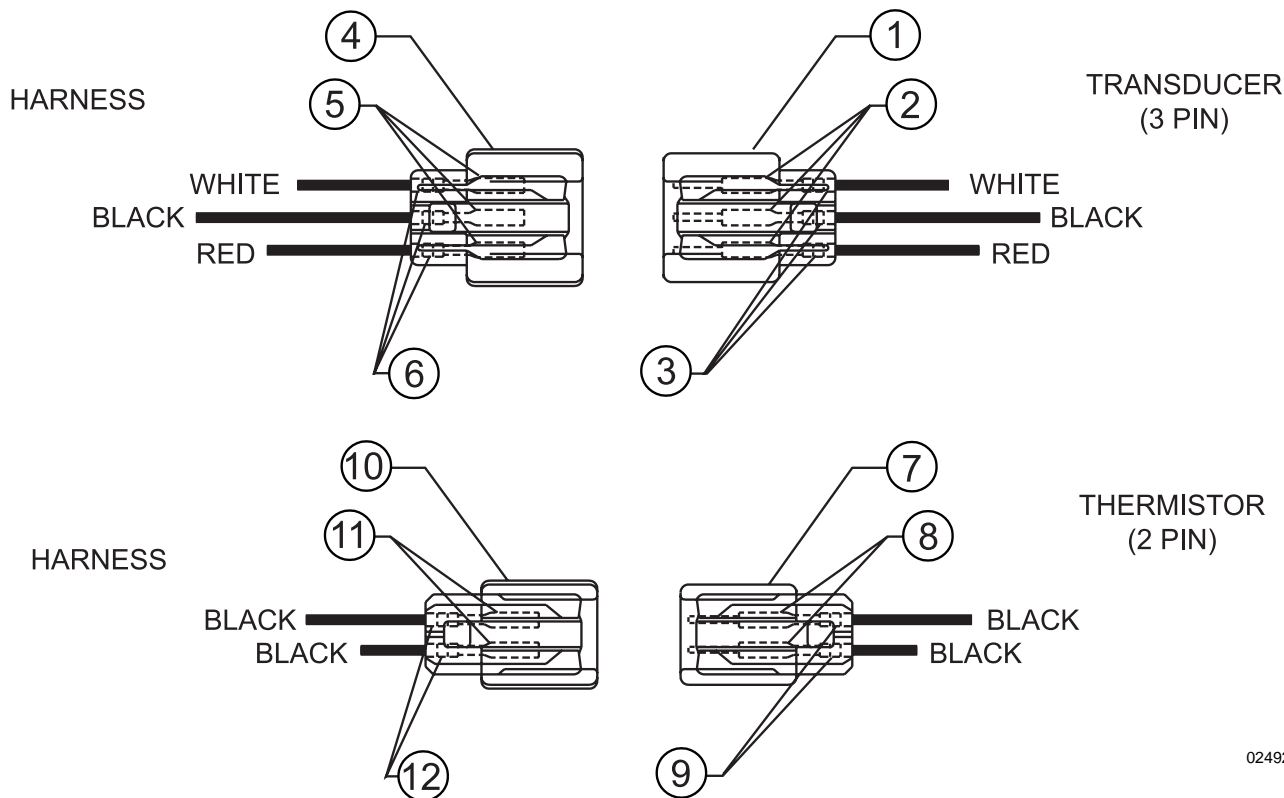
A – TRANSDUCERS AND HIGH PRESSURE CUT-OUT (REF. TABLE 13)
